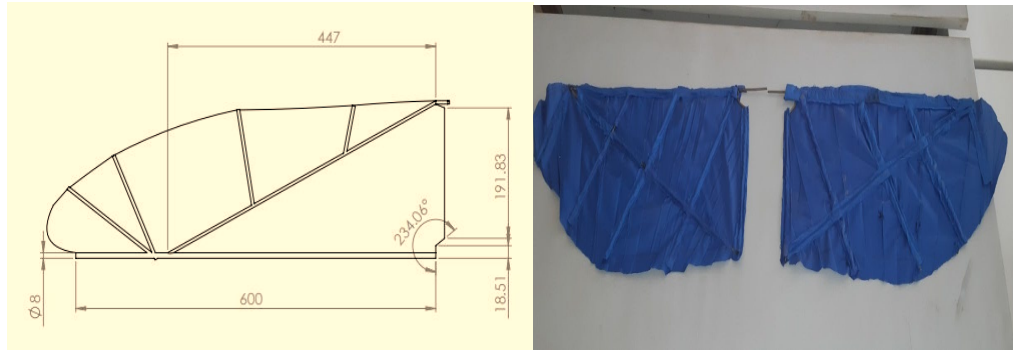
Solidwork Drawing Of Wing with Dimensions, Figure 3 b. Finished Wings
